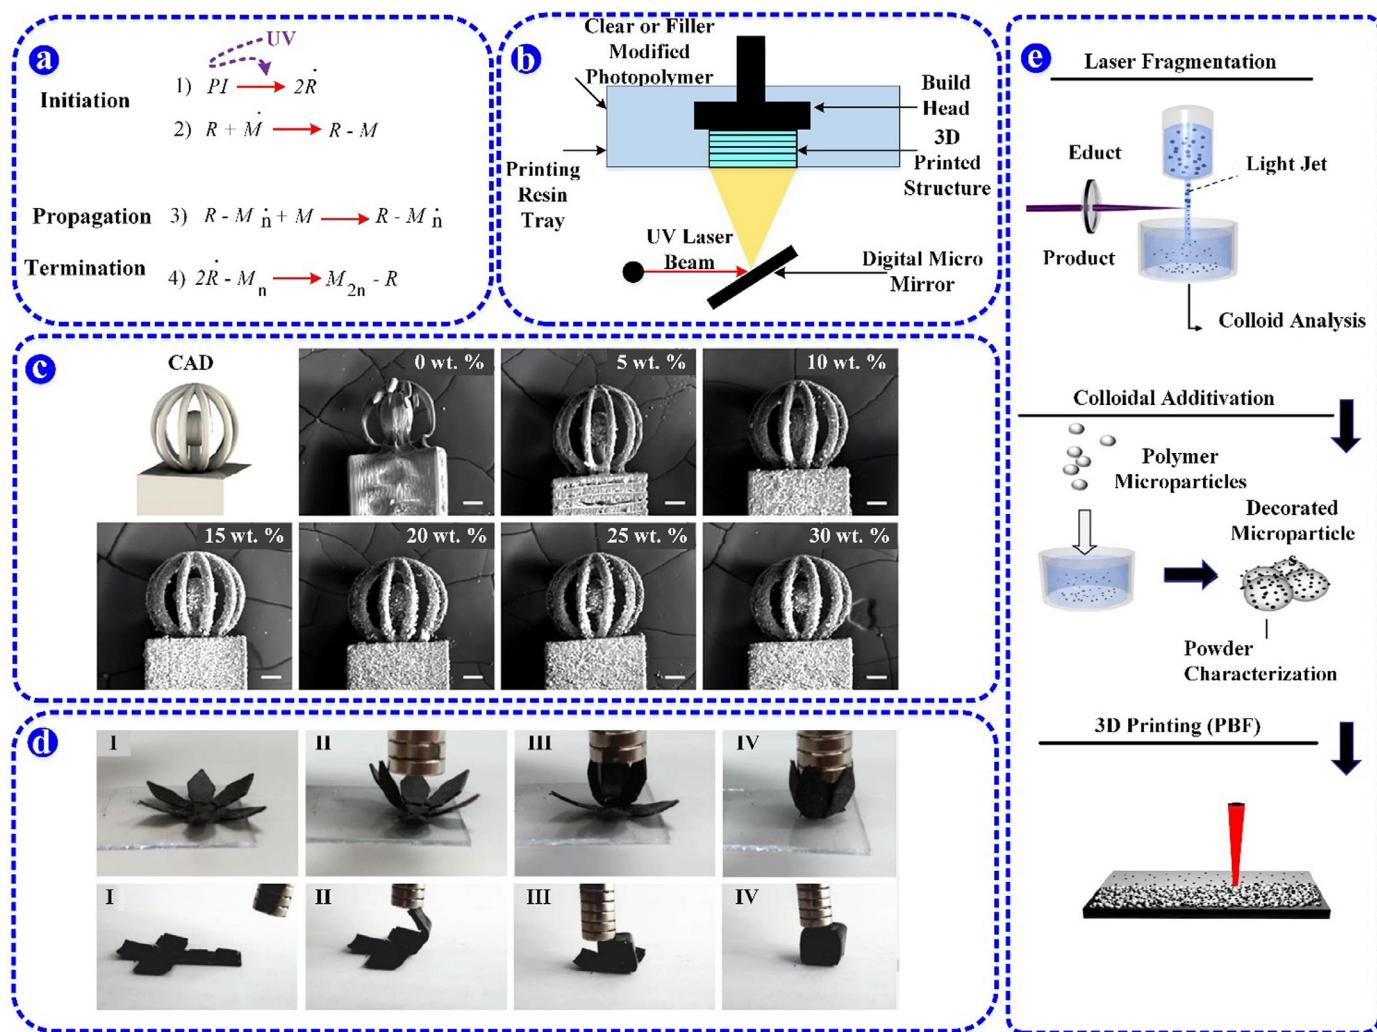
(a) DLP photopolymerization reaction mechanism [60]. (b) Illustration of DLP 3D printing technique [61]. (c) CAD design of hollow spheres and corresponding 3D-printed samples using magnetic resin via DLP technique [54]. (d) DLP 3D-printed MREs, 3D-printed flower and 2D structure composed of flexible and rigid elements able to create a 3D cube when exposed to a magnetic field [62]. (e) Method to blend NPs of IOs into polyamide for nanocomposite powder development for SLS 3D printing [63].
